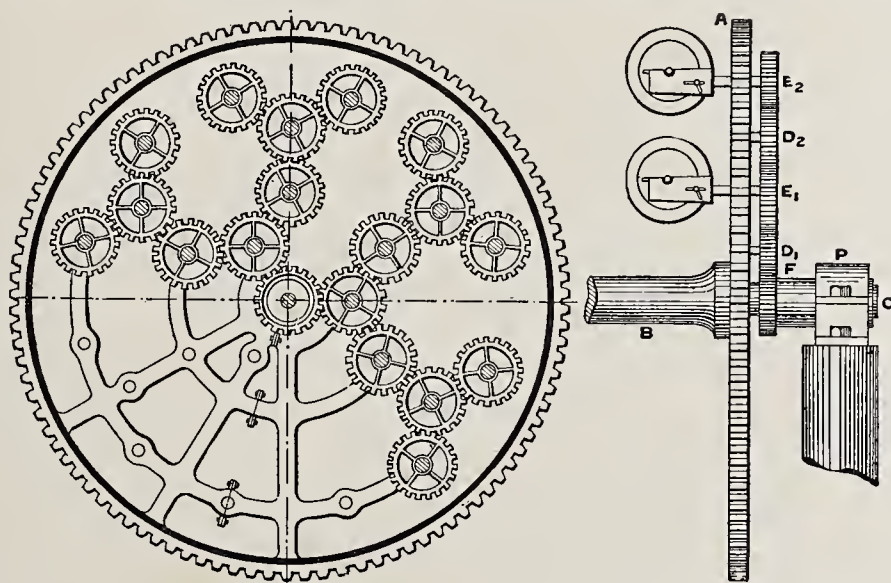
A DISC MACHINE FOR SHEATHING HEAVY CABLES
